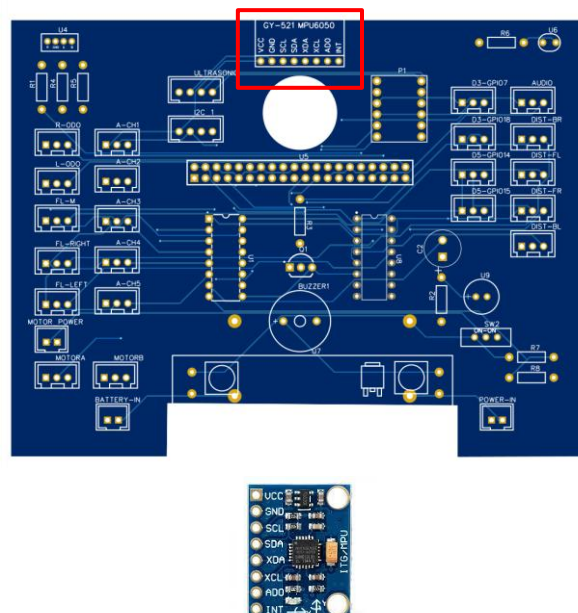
Placement of Accelerometer and Gyroscope on PCB
